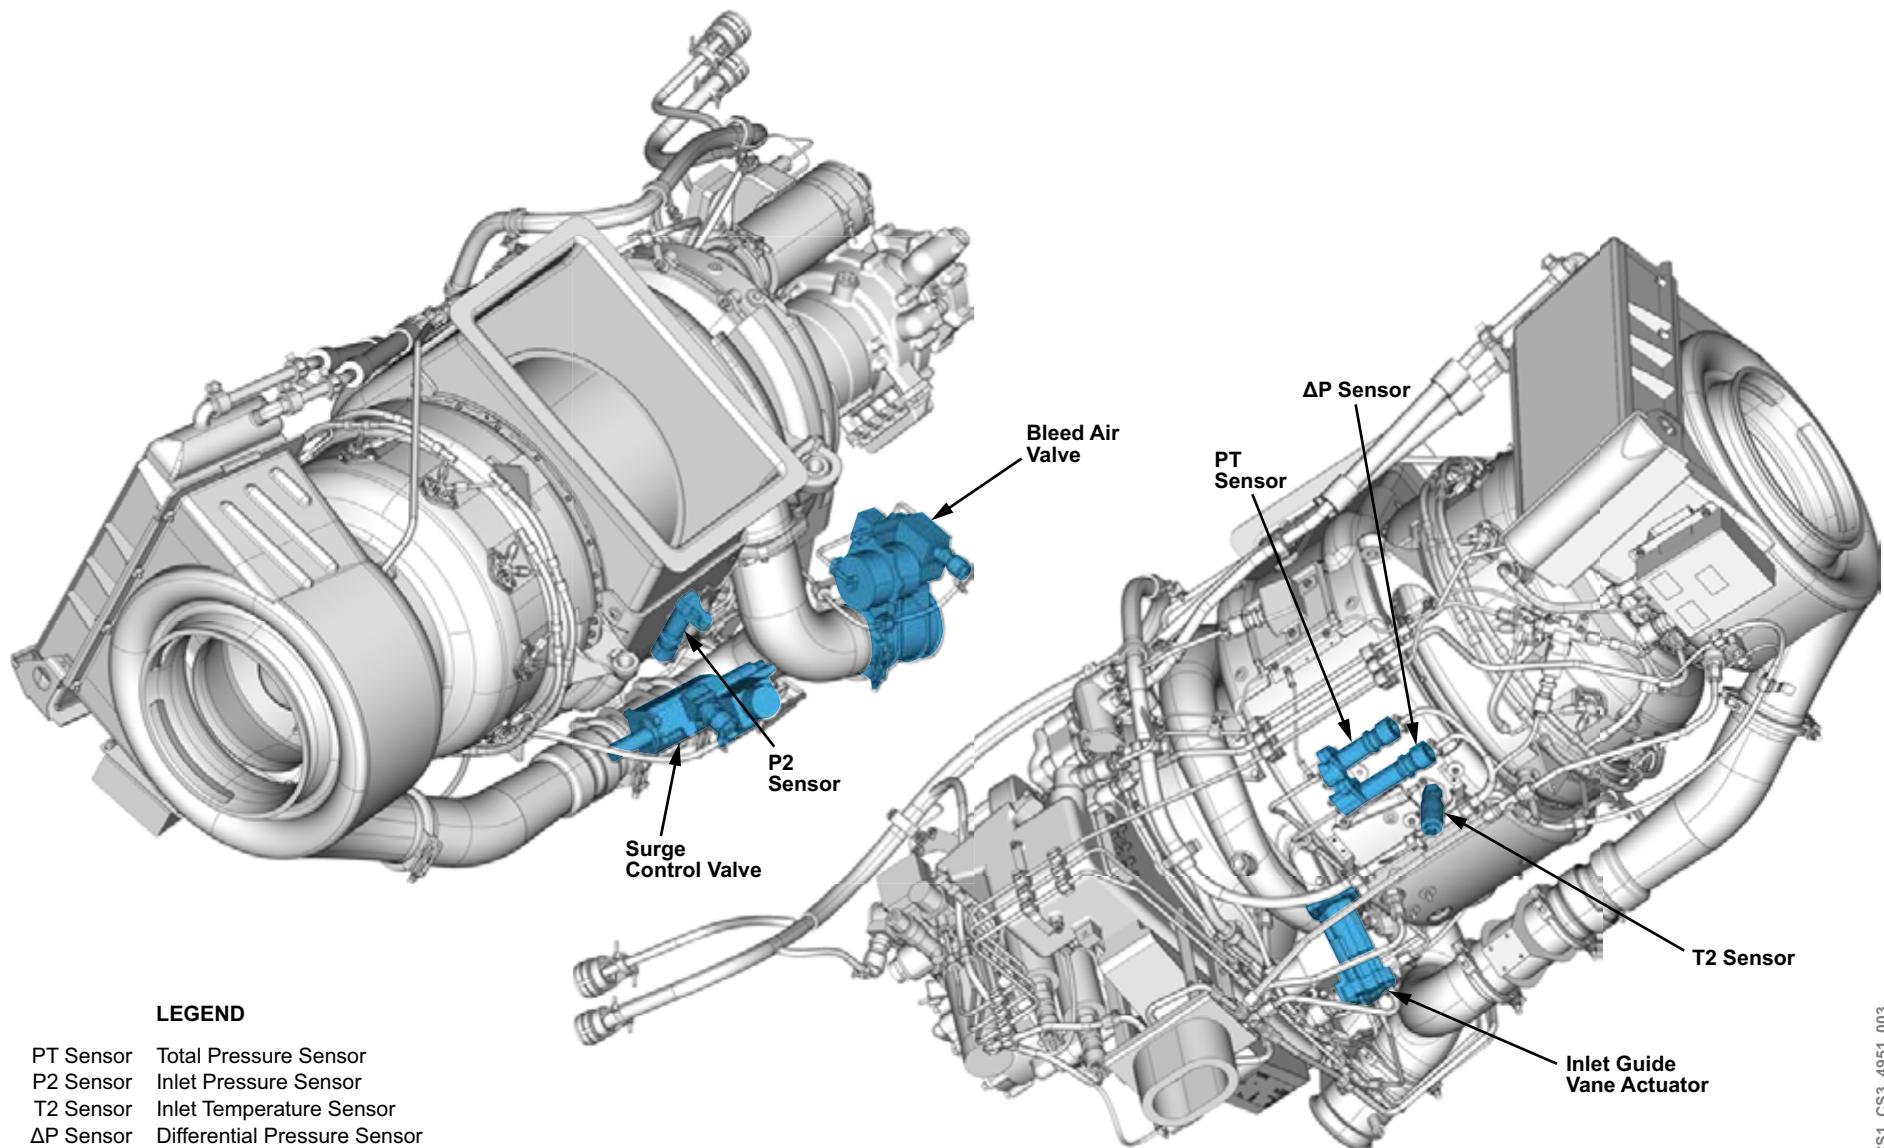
Air System Surge Control Valve, Bleed Air Valve, Inlet Guide Vane Actuator, and Flow Sensors
